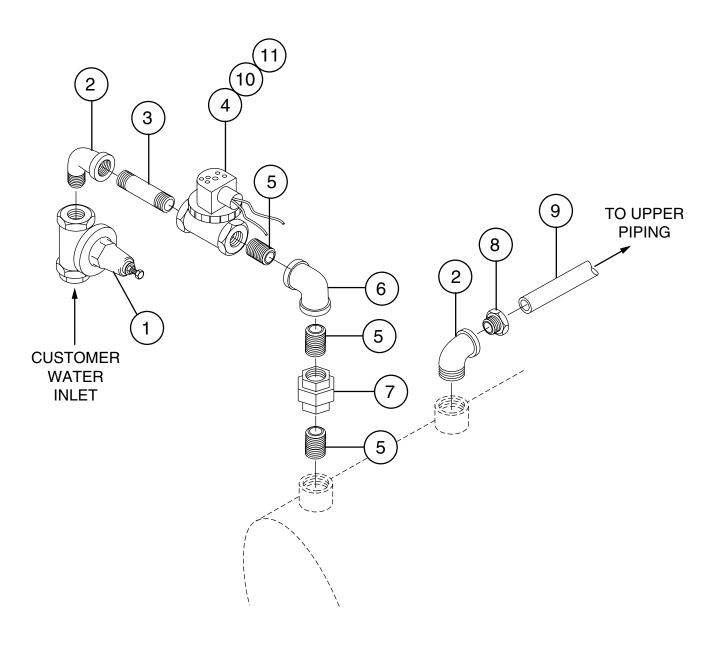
D-HB ONLY Lower Fill Piping Assembly
